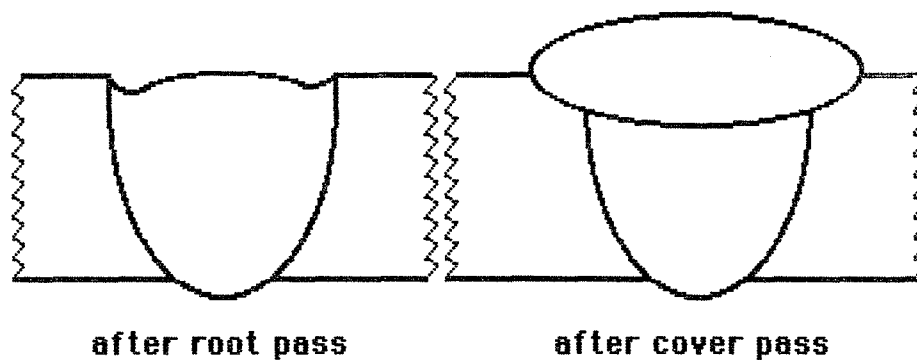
Shape of the weld after the root pass (left) and the cover pass (right) in VPPA welding.
